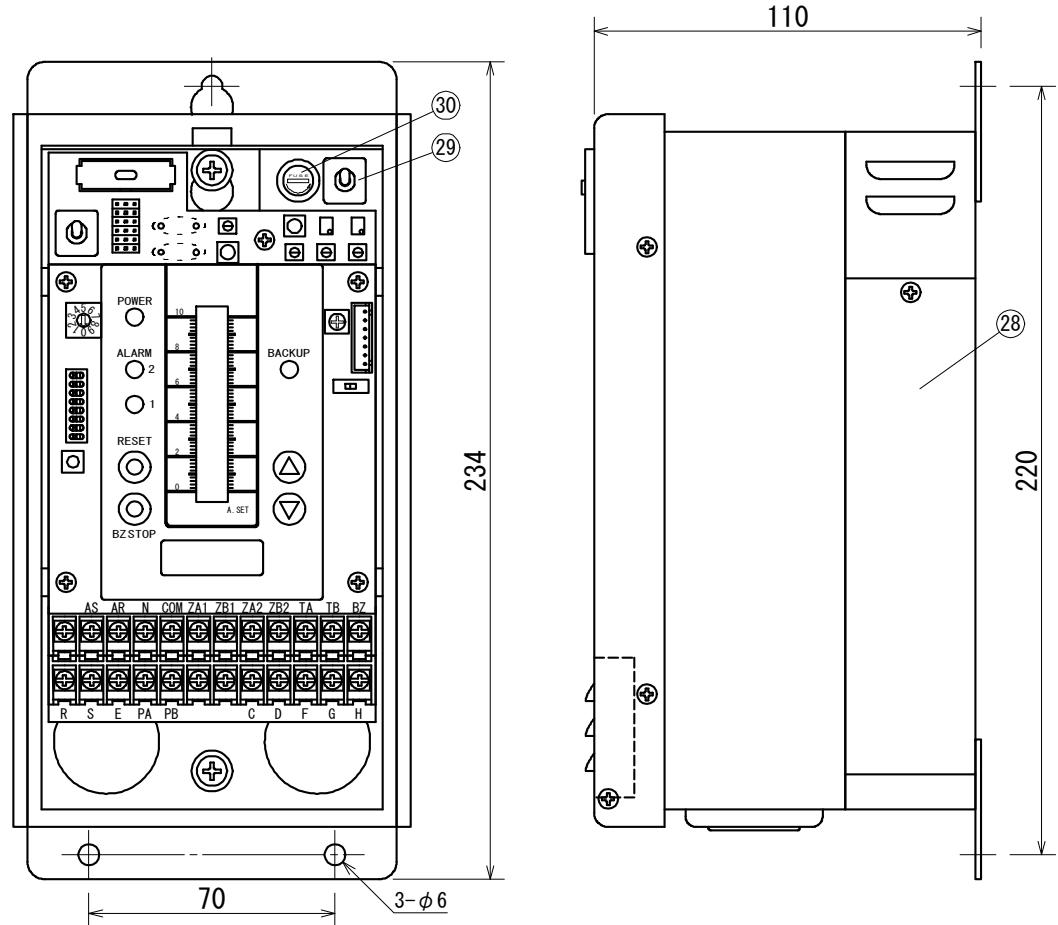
Dimensions of the Indicator and Alarm Unit with a Backup Power Supply
